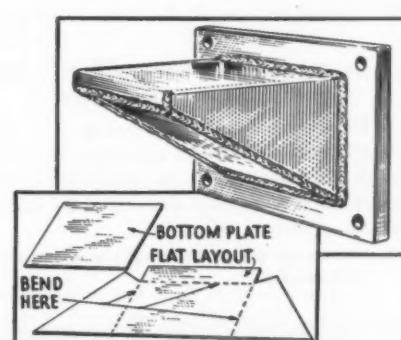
Improved product appearance . . . box-type construction with members sheared, bent to form and welded.
